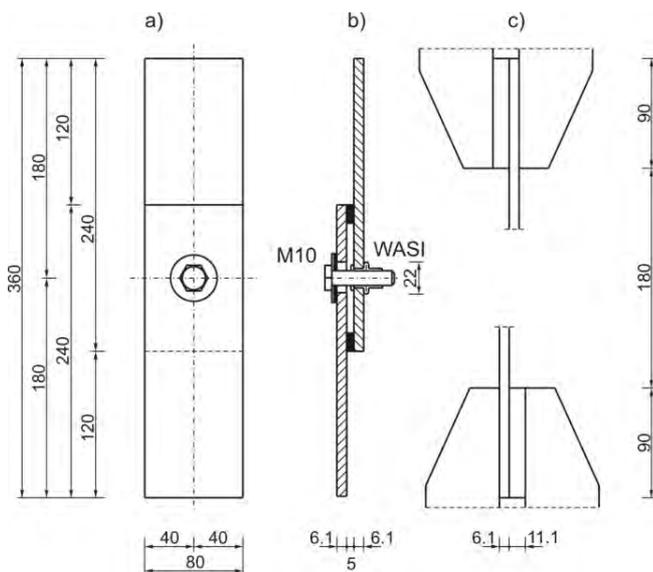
RN-B joint tensile test: a, b) RN-B single-lap joint, c) fastening joint in grips
